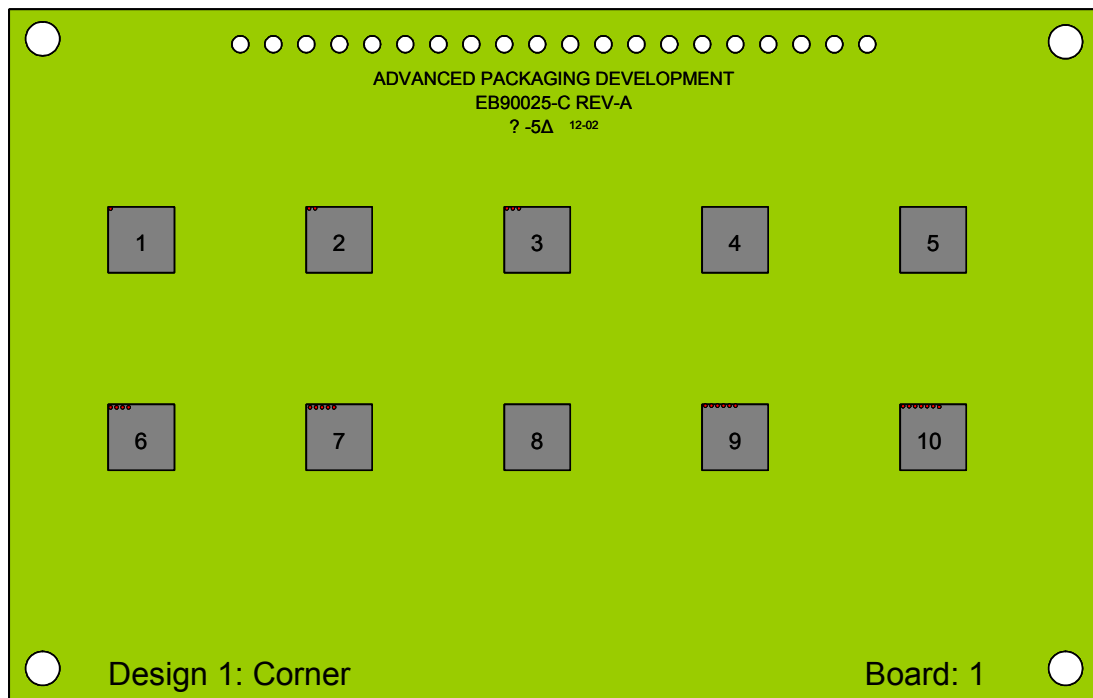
PCB Design with Open Bumps Starting from a Corner (Design 1).
